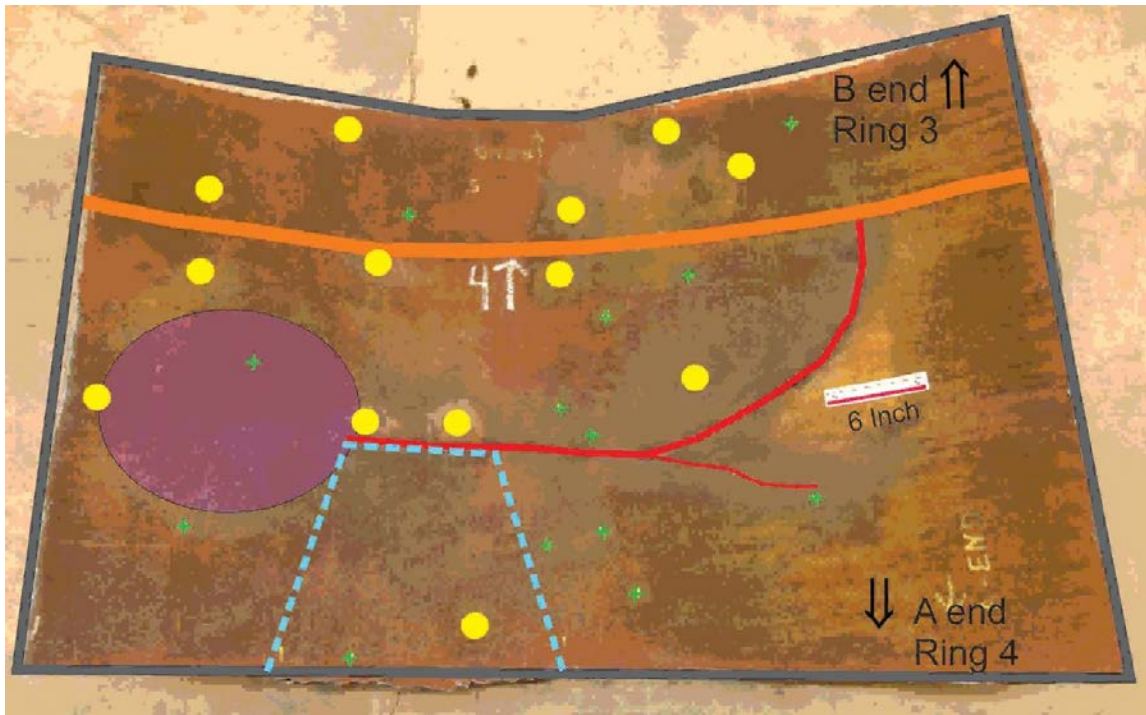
Annotated interior surface of the tank shell section showing the shell crack (red line), corrosion weld repairs (yellow circles), inboard cradle pad termination on exterior/opposite surface (dashed blue line), girth weld between ring 3 and ring 4 (orange line). The purple oval on the left indicates the area with visible interior surface scaling. Ground spots are identified with a green + mark.
